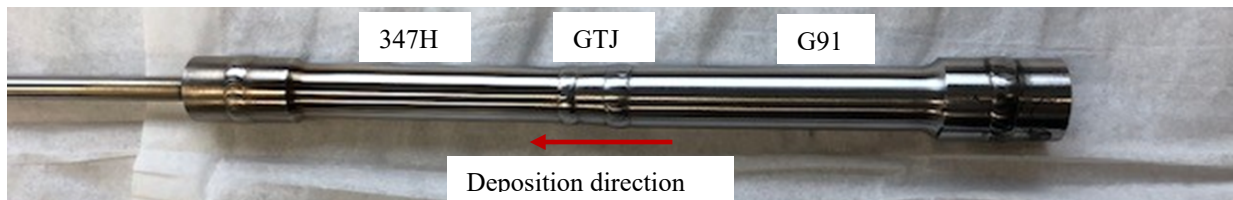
Assembled tube specimen whose subsections from left to right are: 347H, GTJ (deposition is pointed to the left), G91
